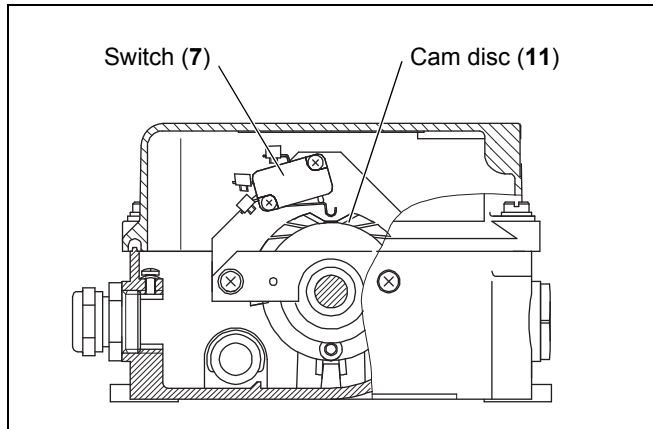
Belt misalignment switch – view with roller lever removed
